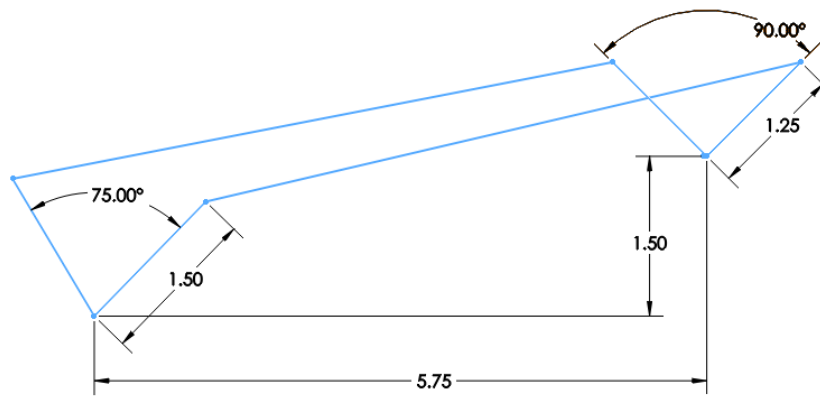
Engine speed controller four bar mechanism graphical analysis design.
